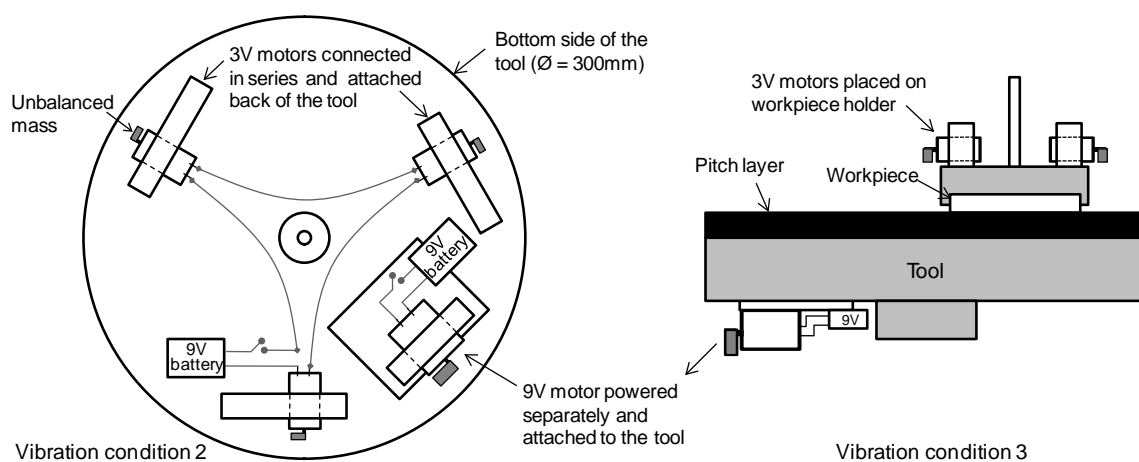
Schematic of condition 2 and 3; 9V motor fixed at bottom for both the conditions while 3V motors switched from tool to workpiece.
